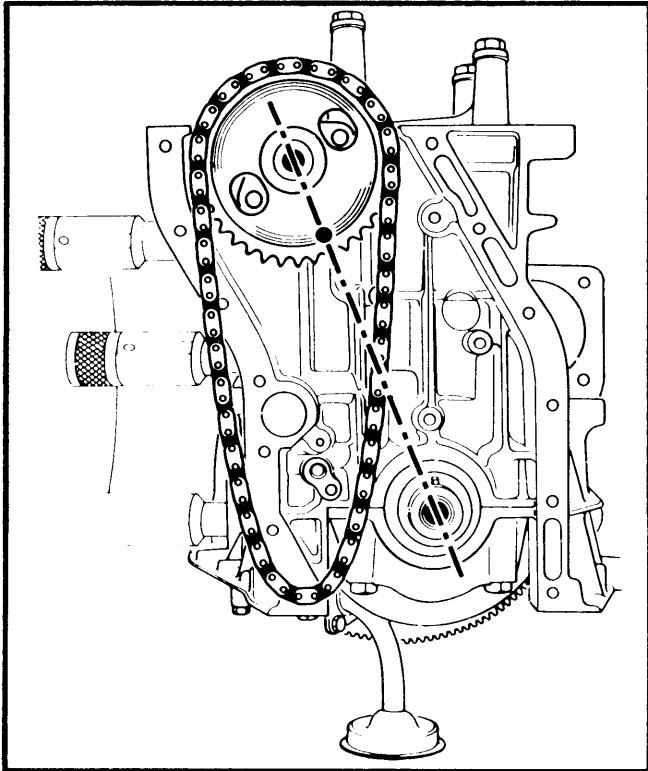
Camshaft Sprocket Alignment Before Timing Chain Installation
